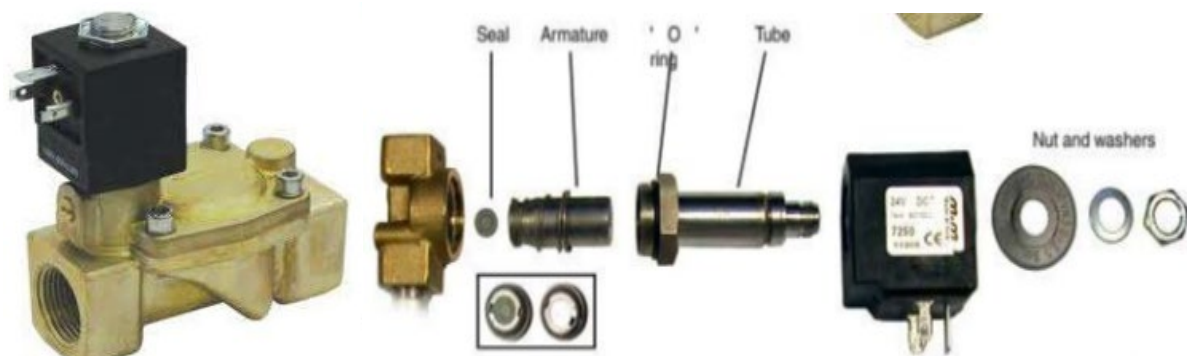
Solenoid valve device (left) and solenoid valve parts (right) [75].
